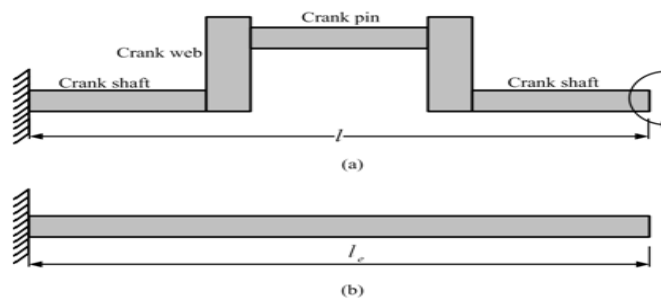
(a) Actual crank shaft (b) The equivalent length of the crank shaft
